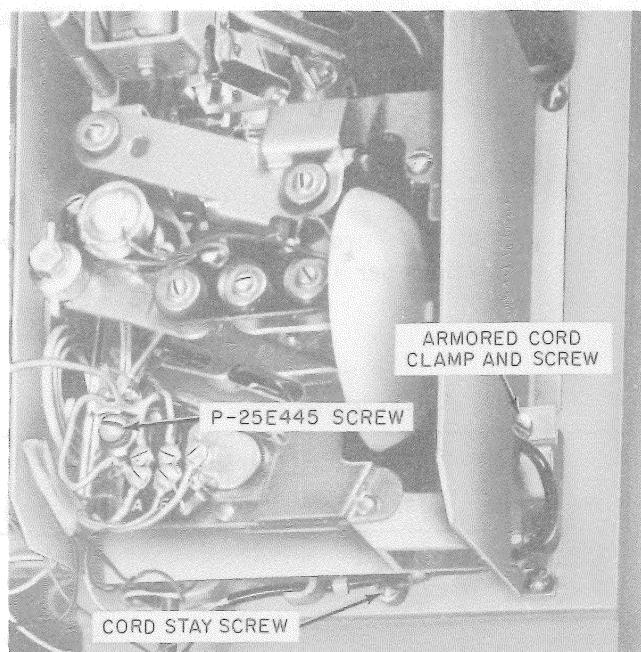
Location of Cord Stay Screw and Cord Clamp
